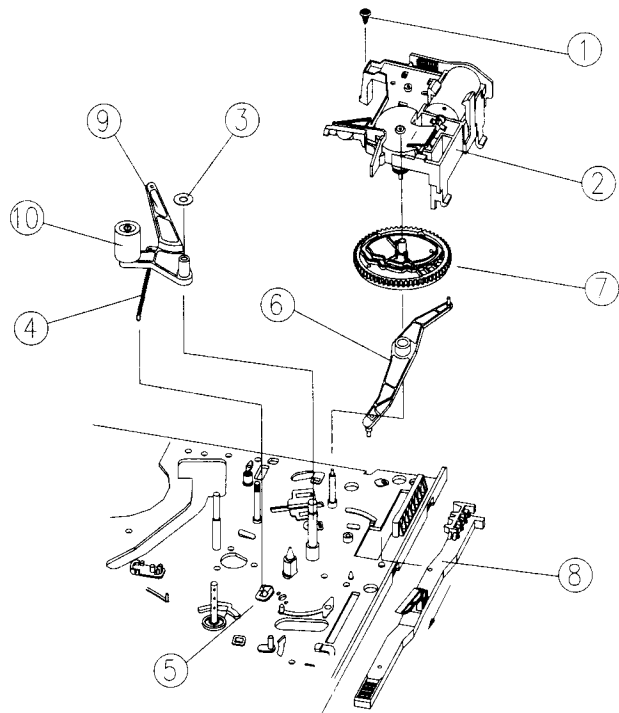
L/C BRKT, PINCH LEVER, CAM GEAR, RELAY LEVER, F/L RACK REMOVAL
